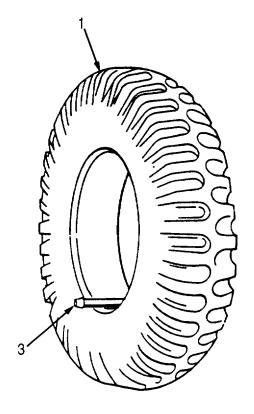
Wheel and Runflat Assembly (M101A3 and M116A3)
